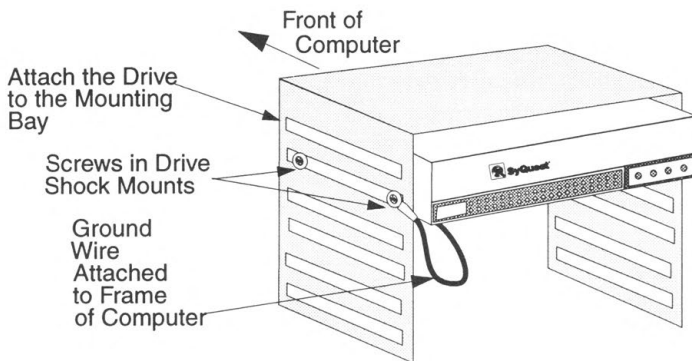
Mounting the Drive In a 3.5-inch Mounting Bay (Rear View)
